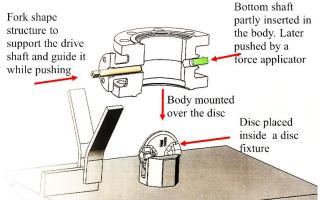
Fixture for accurate positioning of the disc and the body is mounted over the disc.
